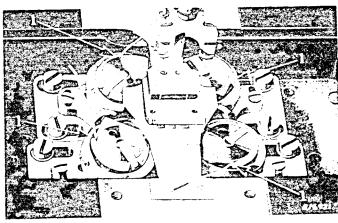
Threading the Bobbin Cases in Machines 131w104. 131w112 and 131w113
